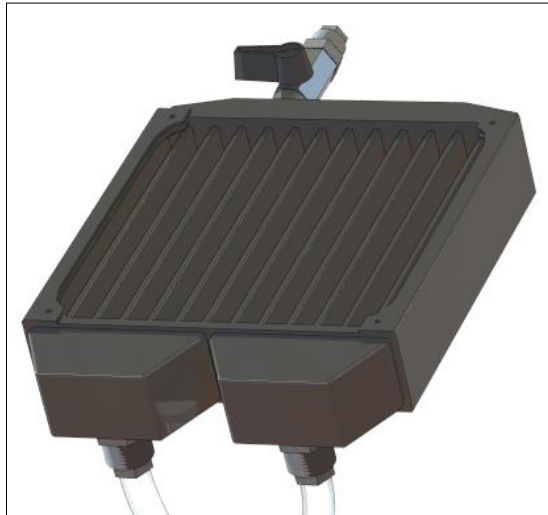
Final condenser design with two pipes and degassing tap (CAD model - SolidWorks).
